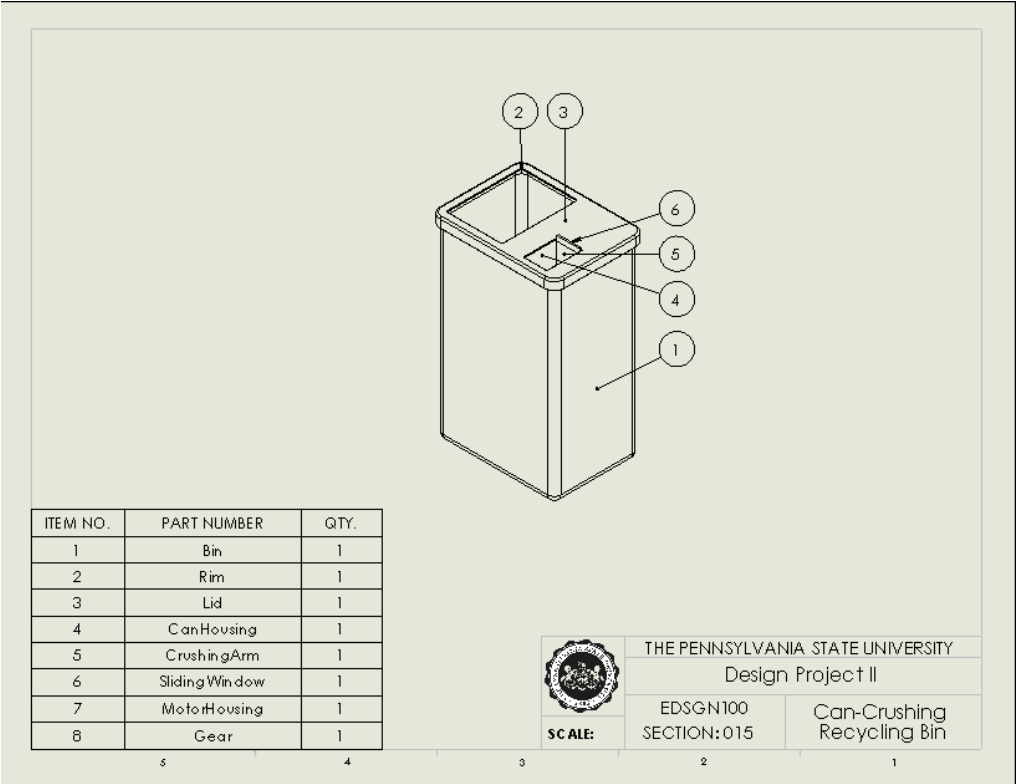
Can Crushing Recycling Bin Assembly Drawing
